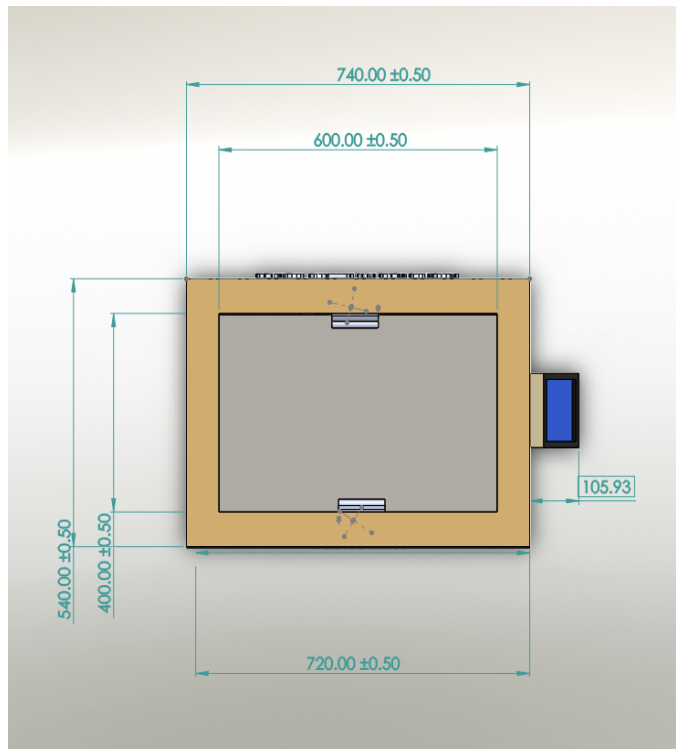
Top View of SaniTech B-Clean with Dimensions in millimeters
